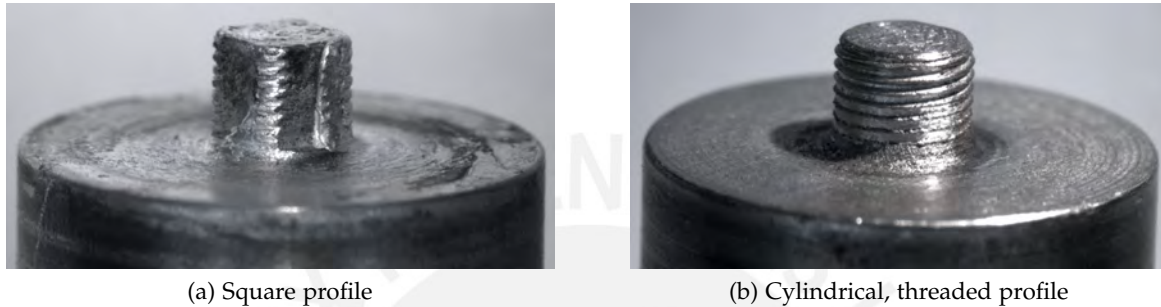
Deposited aluminum between the thread flanks of the tools
